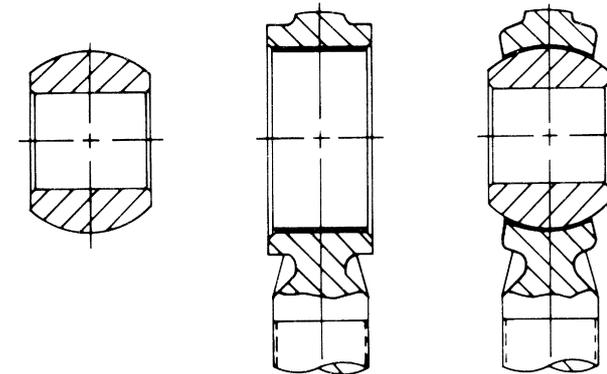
2- PIECE, MOHAWK ROD END
